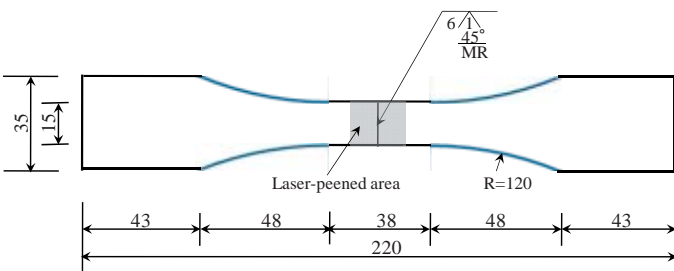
Butt-welded specimen for fatigue test.
